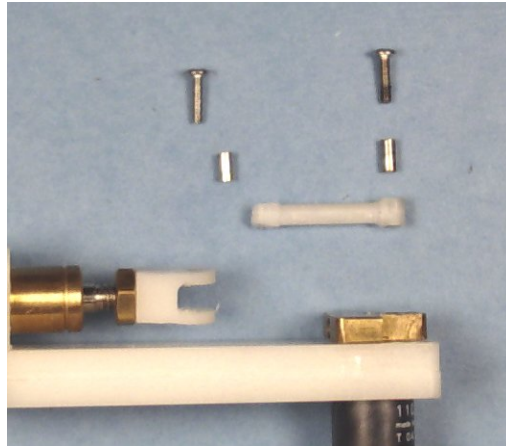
Exploded view of Maxon Compressor Linkage Showing Axle Tubing and Screws
